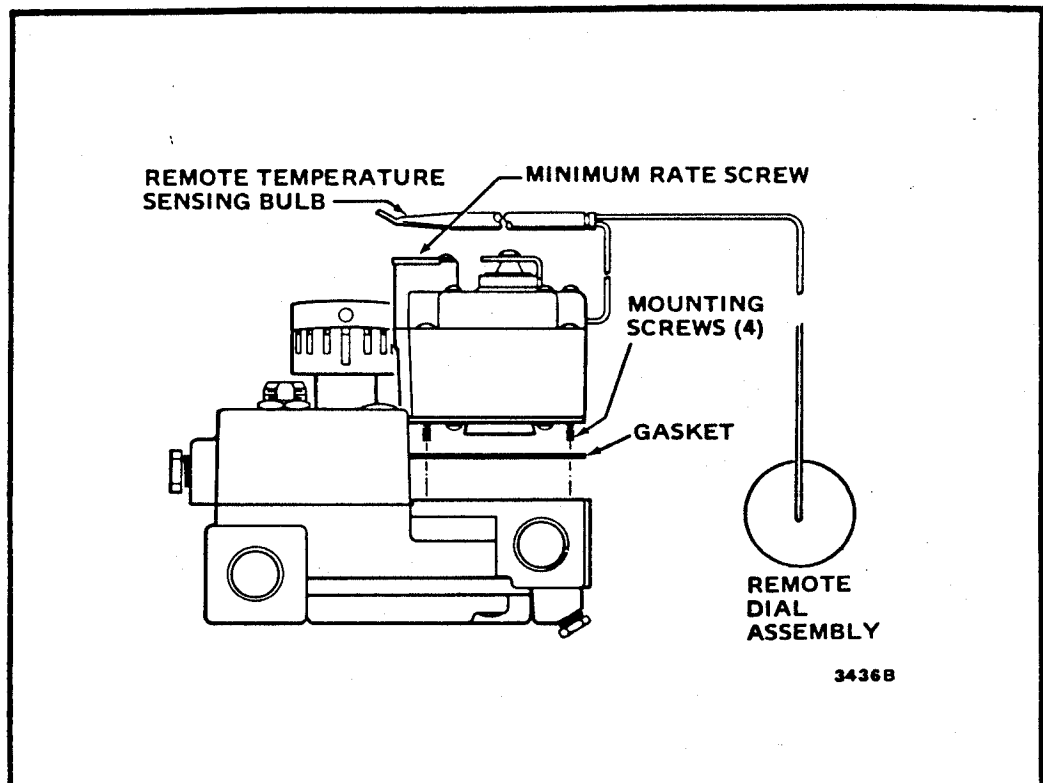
Mounting T5298 Remote Dial Modusnap Operator.
